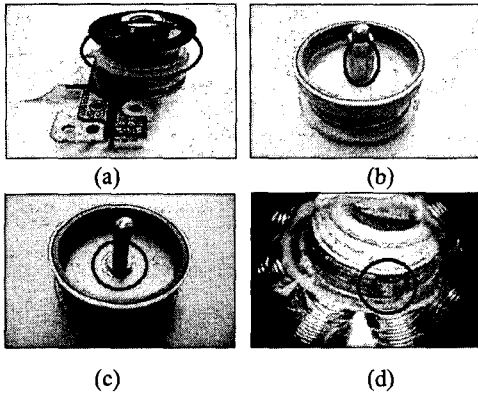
Failure causes of the spindle motor: (a) the tilting of a turntable; (b) metal bearing wear; (c) rotor case wear; and (d) lamination of bond
